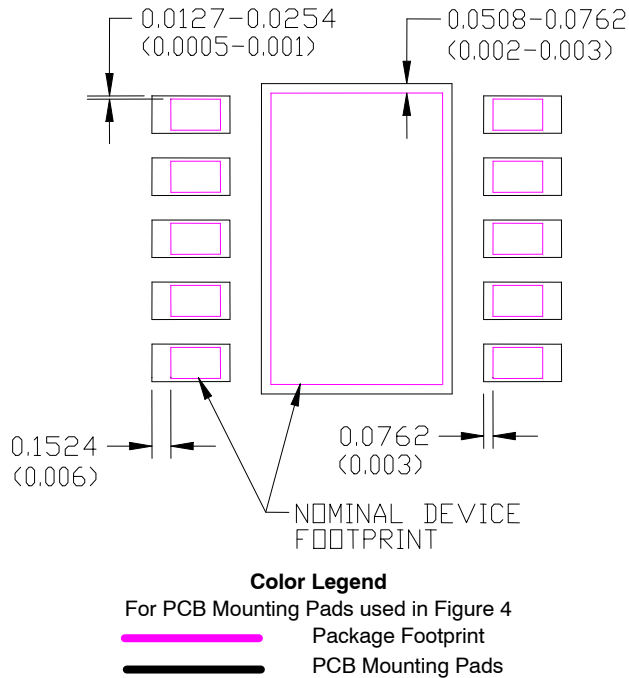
10 Pin DFN Package Footprint Shown with PCB Mounting Pads
